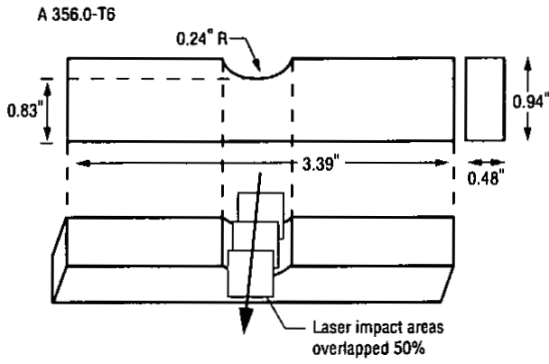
Configuration of notched fatigue test specimens loaded in three-point bending to test the effects of laser shock processing (LSP) on sand castings, showing overlapping impact areas at root of notch (Ref. 59)
